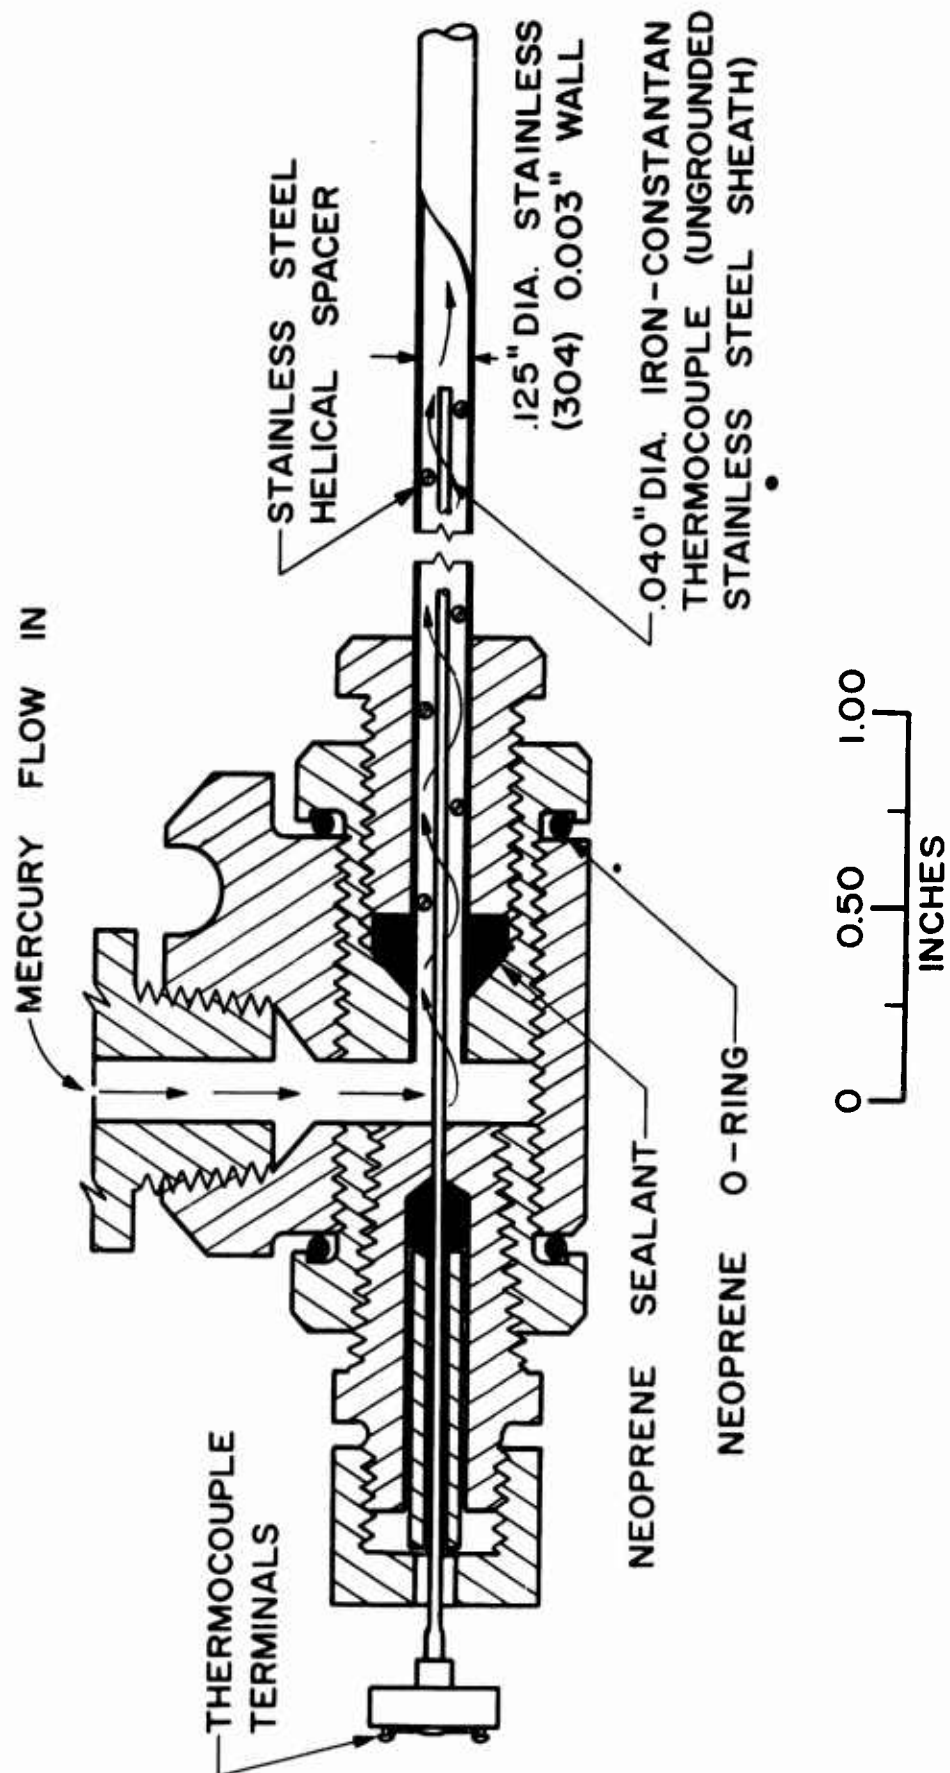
CROSS-SECTIONAL DETAIL OF PROBE THERMOCOUPLE AND COOLANT FLOW CONFIGURATION (TO SCALE)
